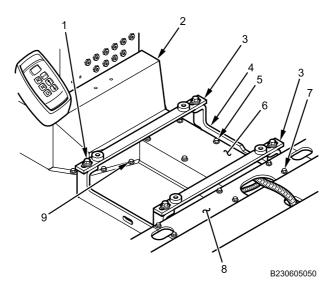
Electrical Harness Storage Duct Center Rear Cover.
